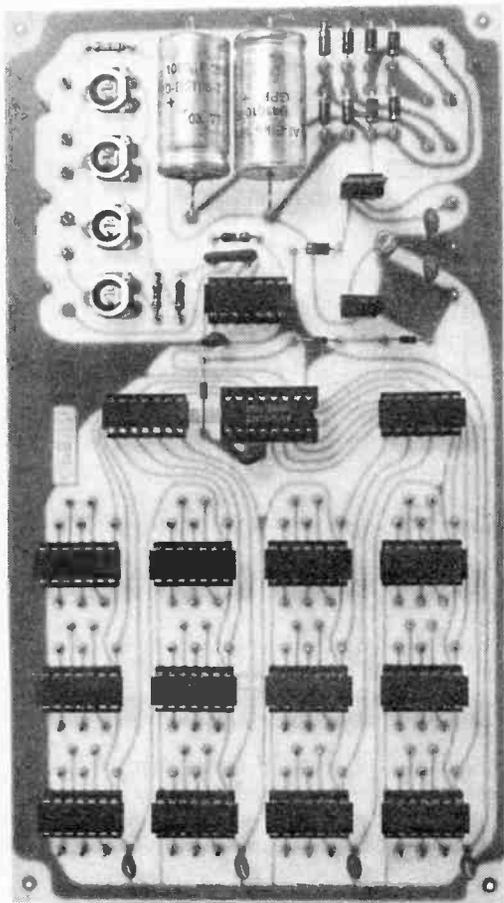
Printed circuit layout of P.S.U./Tone Generator p.c.b.
